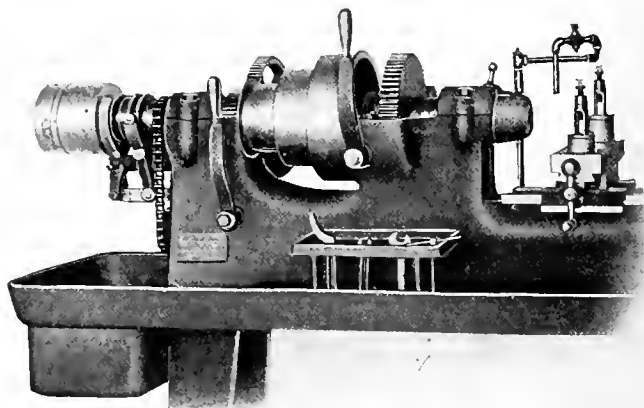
View of Headstock End showing Construction of Friction Geared Head
